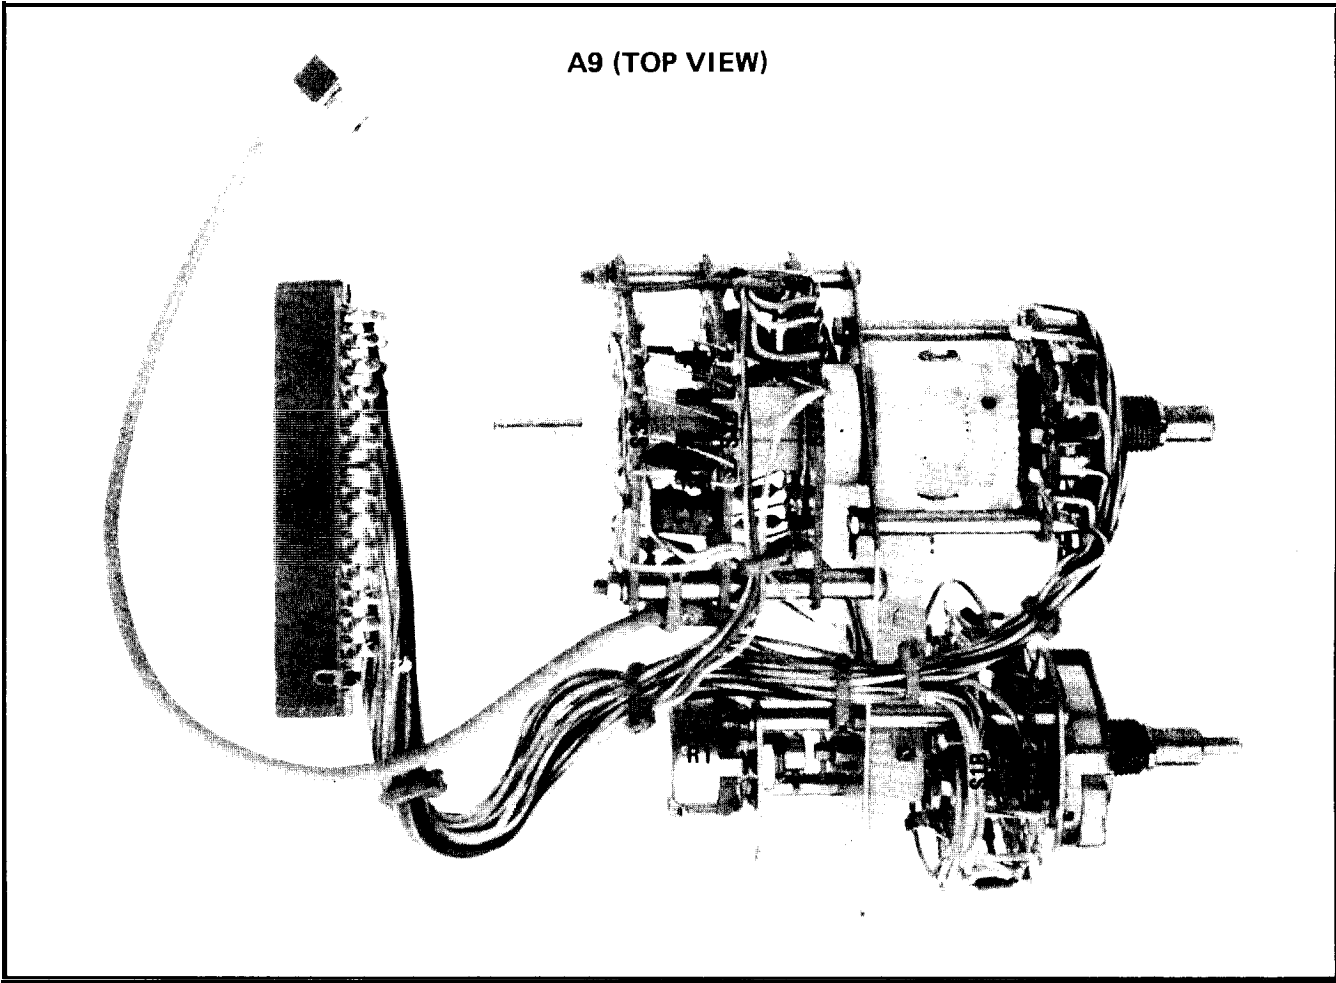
P/O A9 Peak Deviation and Range Switch Assembly Component Locations (1 of 2)
